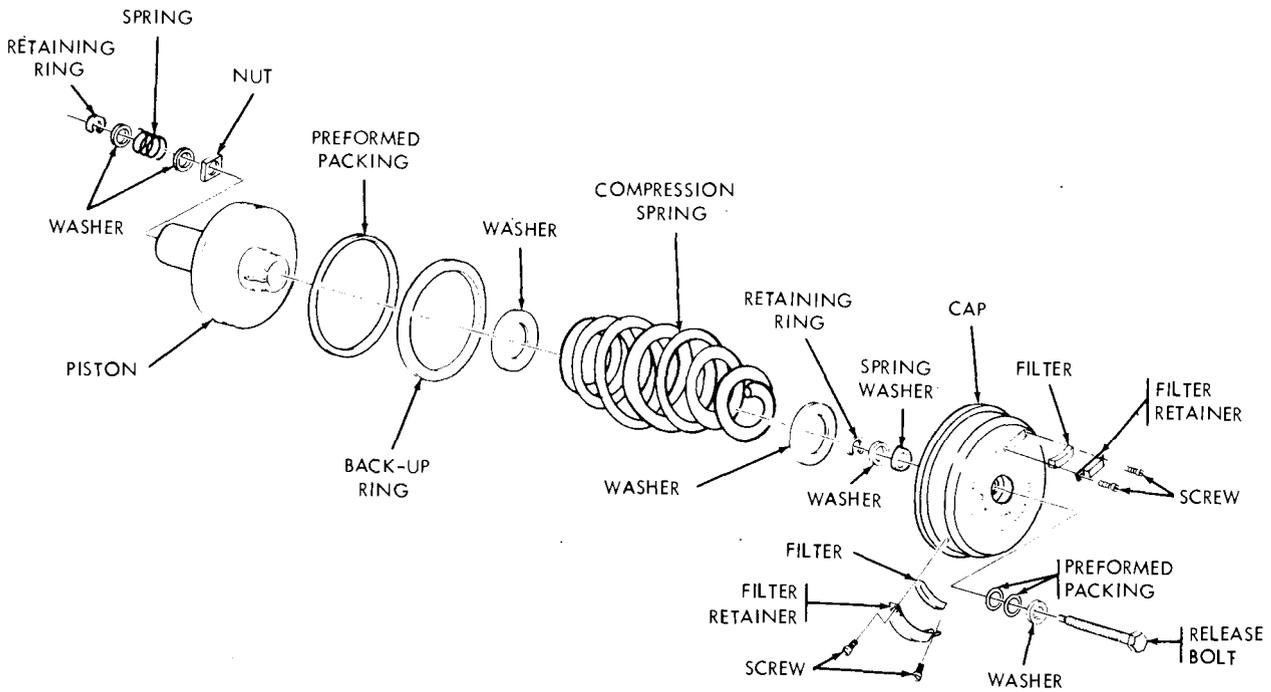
Fail-safe chamber cap assembly (semitrailer No. 201 and on ).
